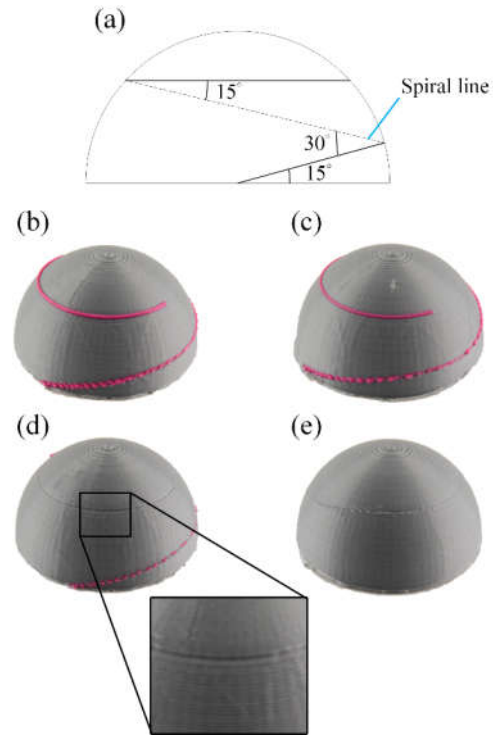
The minimum diameter of printable fracture line for FDM 3D printer: (a) 2D drawing of semicircular and spiral line (simulated as fracture line); The diameter of the fracture line is (b) 0.6 mm (c) 0.5 mm (d) 0.4 mm (e) 0.3 mm
